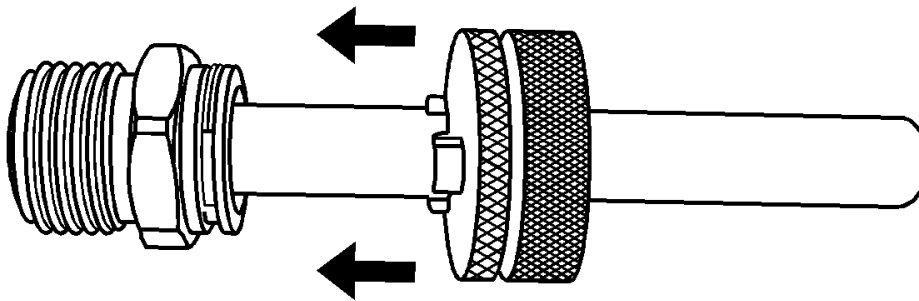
Sliding Quick Release Tool Toward Generator Cooling Inlet Pipe Fitting
